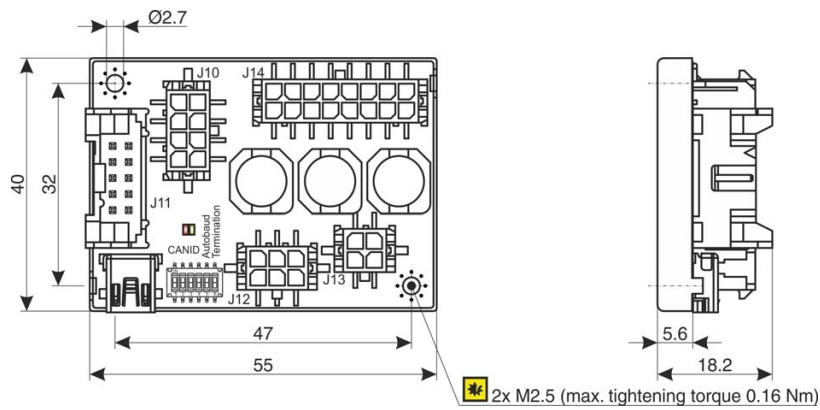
Dimensional Drawing [mm] – DC/EC (390003)
